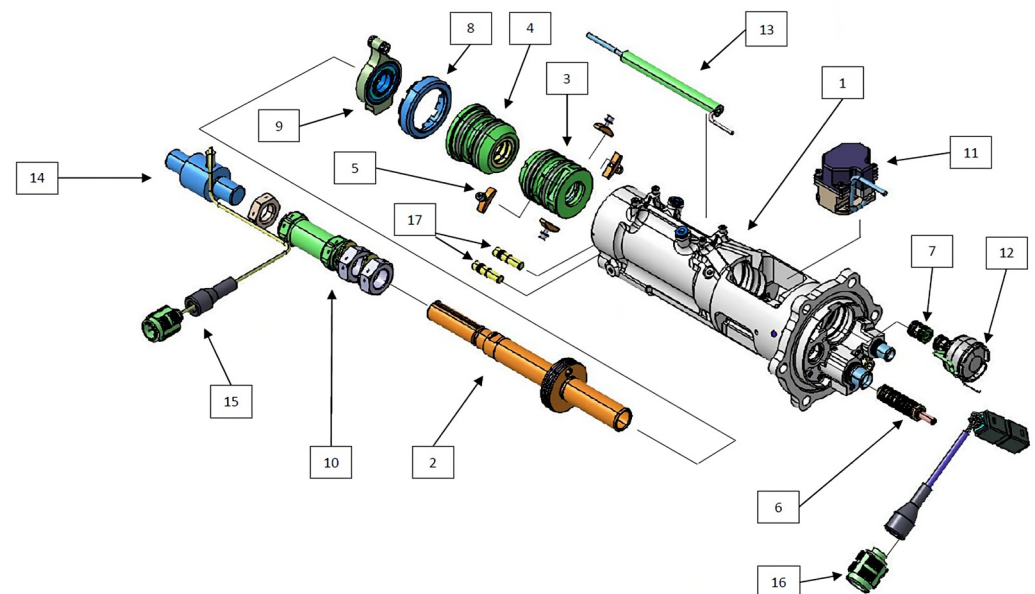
Exploded view of the internal EHSA: (1) Manifold, (2) Piston, (3) Inner gland, (4) Outer gland, (5) Segment gland, (6) Bypass valve, (7) Piloted solenoid valve, (8) Gland nut ring, (9) LVT support, (10) Joint tube, (11) EHSV, (12) Solenoid, (13) LVT, (14) Load cell, (15,16) MIL-DTL-38999 Series III electrical connections, (17) Relief valve.
